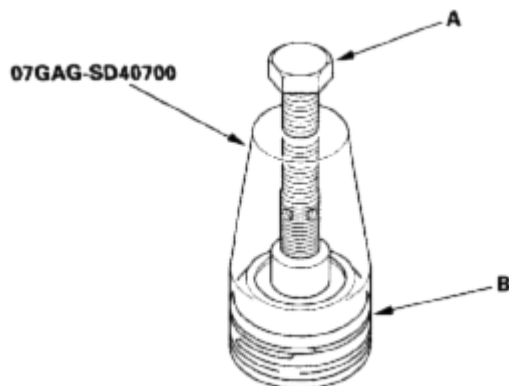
Adjusting Ball Joint Boot Clip Guide With Adjusting Bolt
